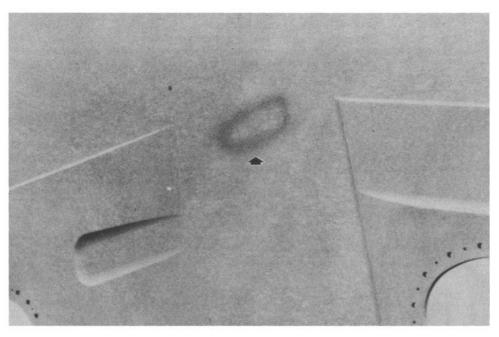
Milling defect associated with the NC machining af 7075-T7651 aluminum plate with a 75 mm (3 in.) diam milling cutter. Courtesy of McDonnell Douglas Canada, Ltd.
